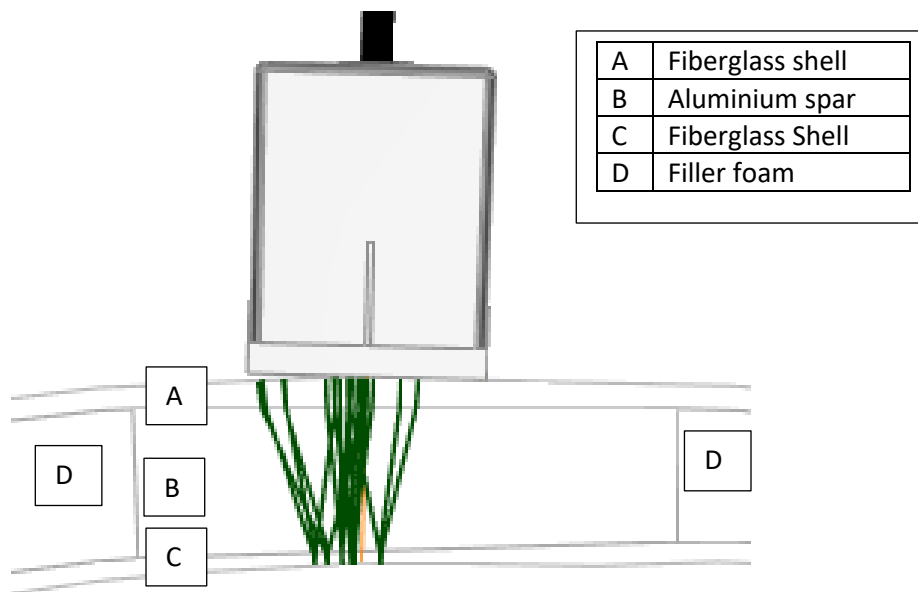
Inspection cross-sectional view with PA without wedge
